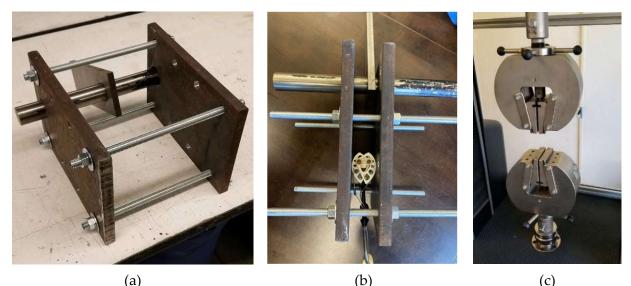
Tensile testing equipment. (a) Tensile Test Fixture, (b) Sample Cam within Test Fixture, (c) Ametek Tensile Tester Jaws
